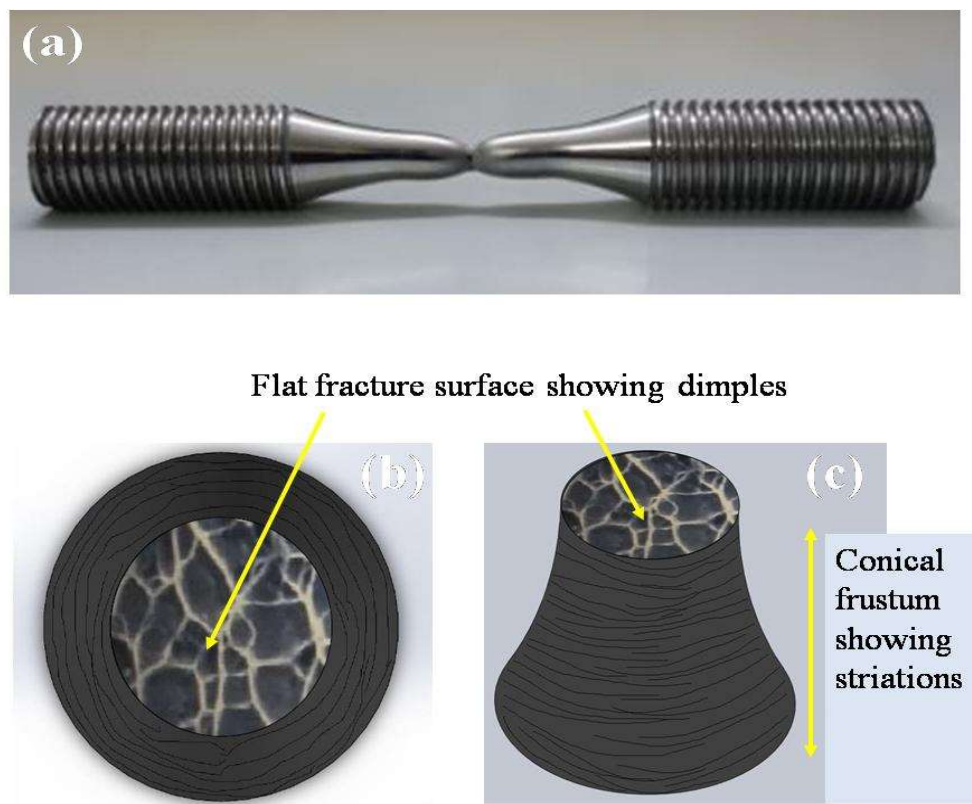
Features of modified 9Cr-1Mo steel fatigue specimen fractured under ratcheting fatigue: (a) fatigue specimen fractured from ratcheting fatigue showing necking (b) schematic presentation of the fracture end in vertical orientation showing flat surface in the central region with dimples and annular region showing striation like features and (c) isometric view of the fracture end showing flat fracture surface at the top with dimples and tapered surface of cone like frustum with striations.
